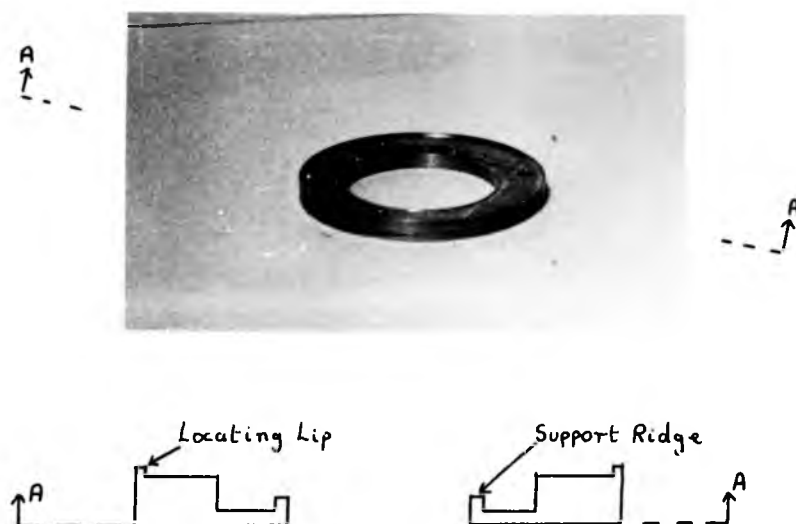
PHOTOGRAPH AND CROSS-SECTIONAL DRAWING OF
